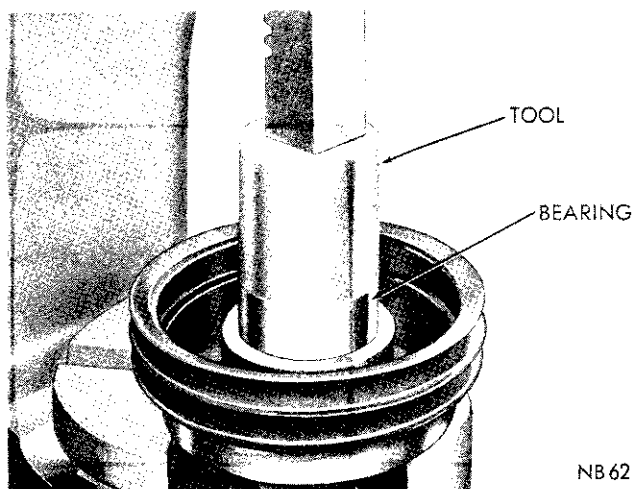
Installing a New Bearing in the Pulley Assembly (Typical)
